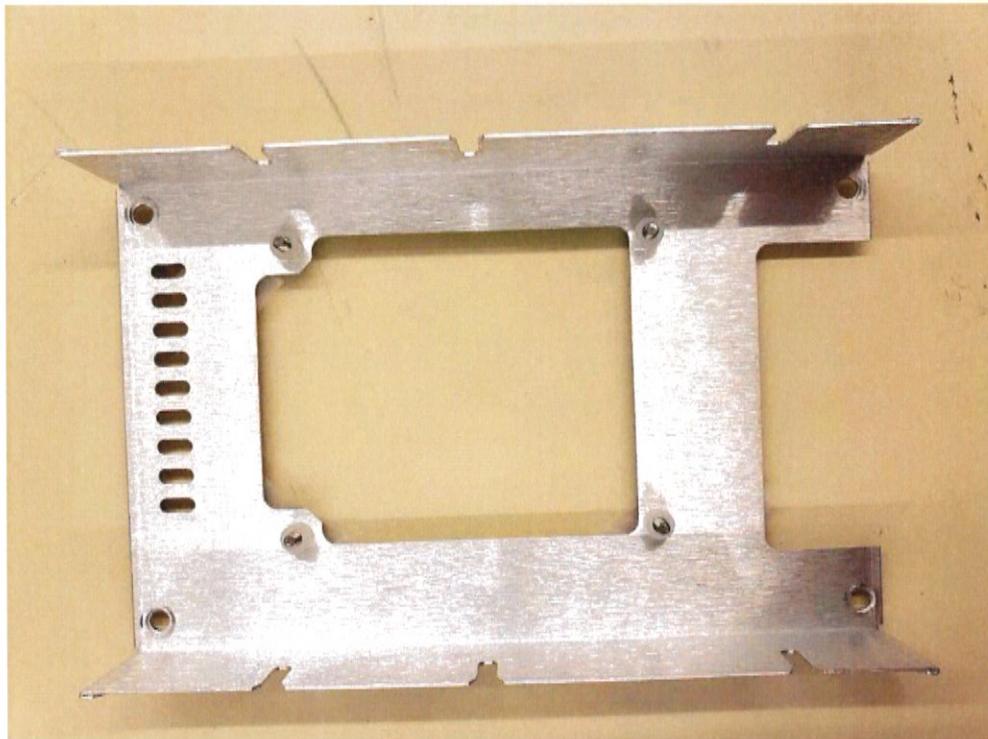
HDD/SSD mounting bracket. Showing the plastic spacers over the screws.
